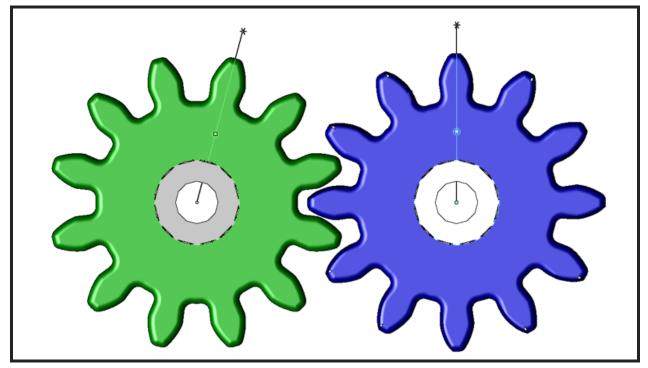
A 15° rotated position of the green Drive Gear with the Multi Tooth, Rotational Contacts for Axial Backlash and Fi".
